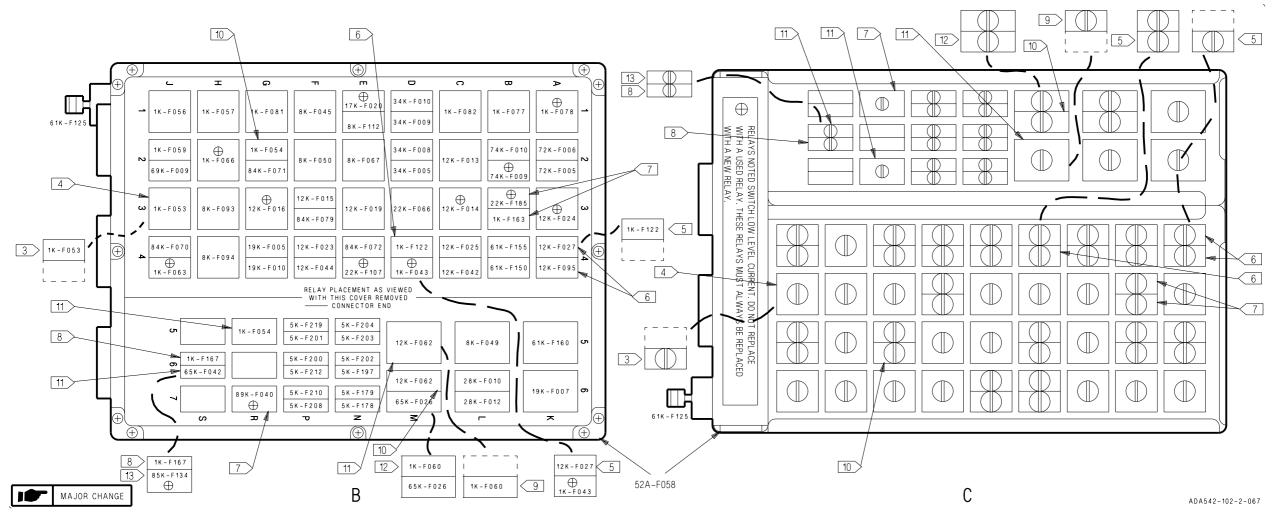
No. 2 Relay Panel Assembly - 52A-F058 (Sheet 2)
